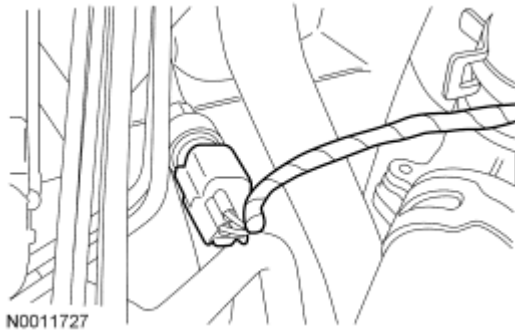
Locating A/C Pressure Transducer Electrical Connector
